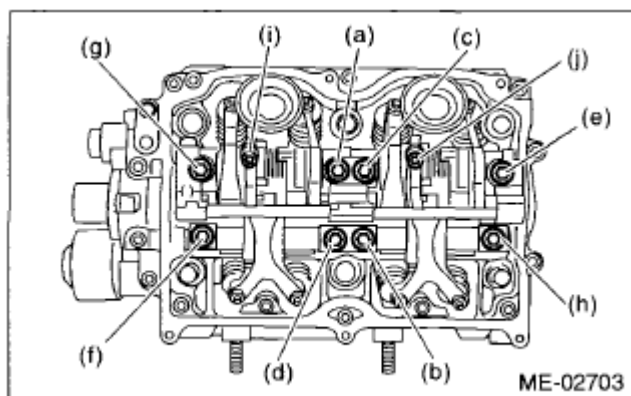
Identifying Valve Rocker Assembly Bolts Tighten Sequence
